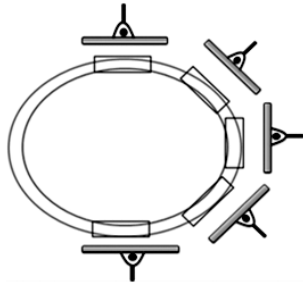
Schematic of pipe weld experiment with different welding positions
